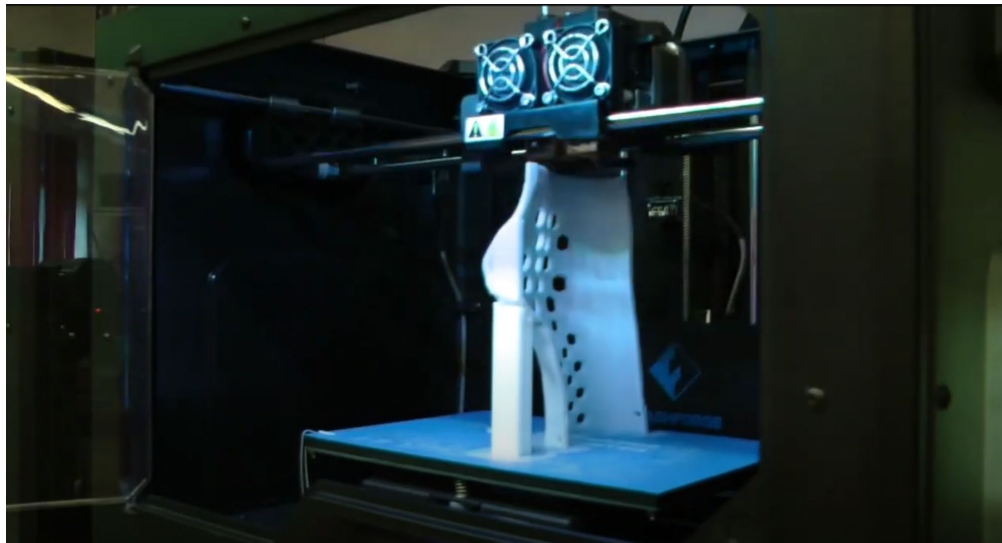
3D printing of orthosis using FlashForge Creator Pro machine
